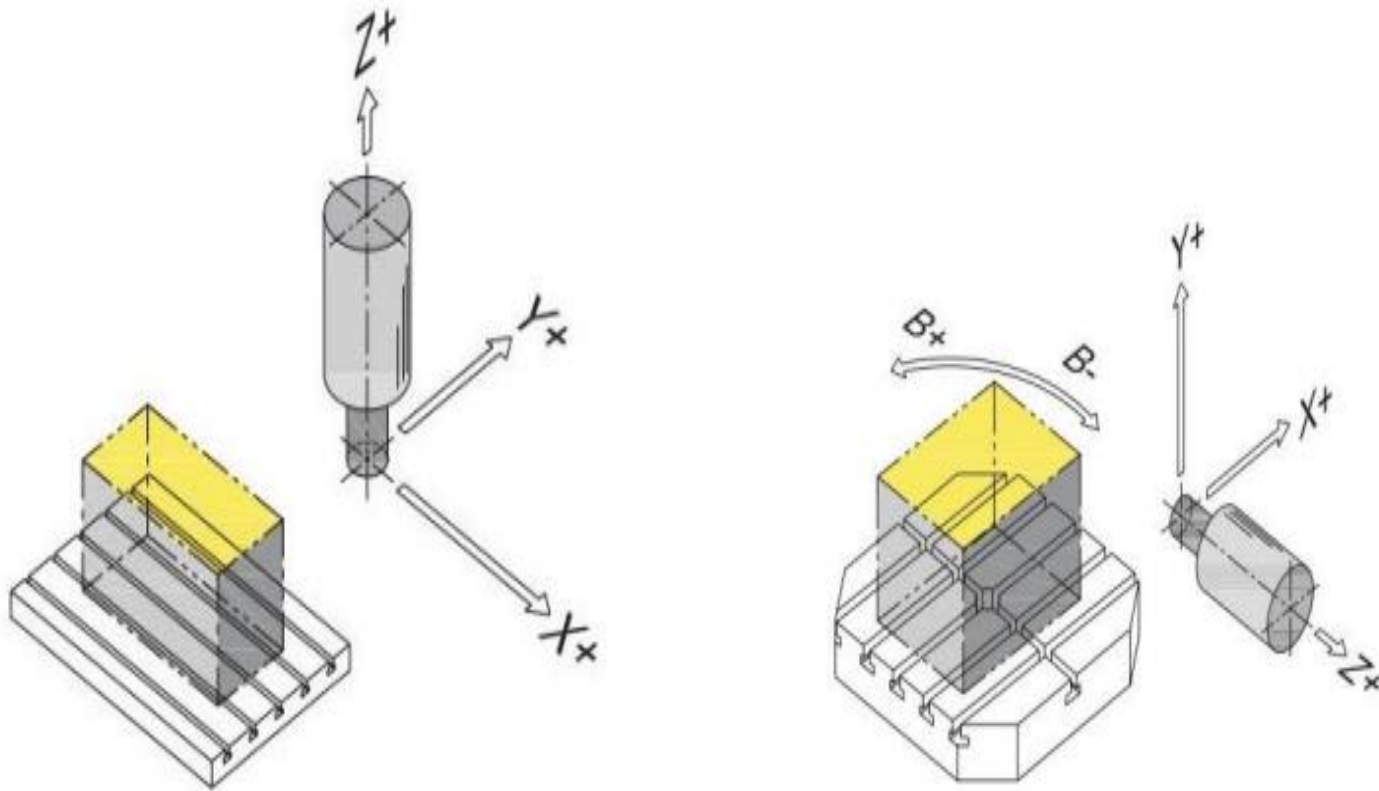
Schematic illustration of (a) CNC vertical machining center and (b) CNC horizontal machining center
